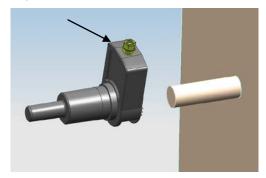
Shaft Adapter Assembly Hex Nut Location.
